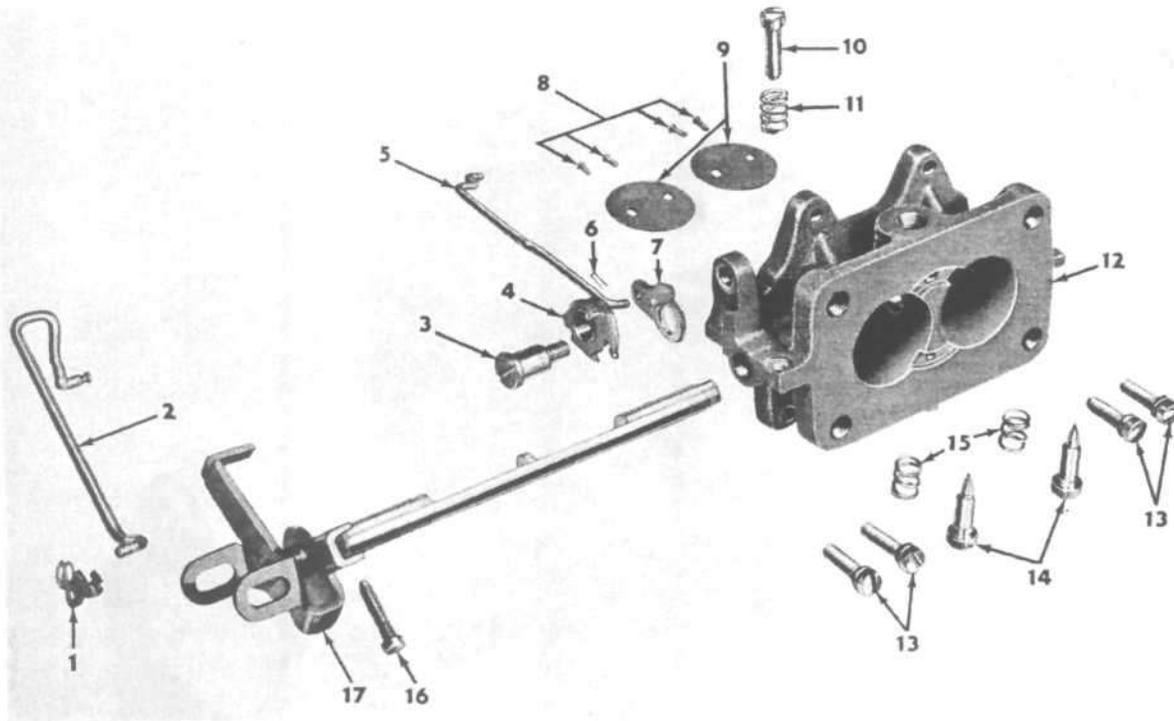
2204S BODY FLANGE AND ATTACHING PARTS
